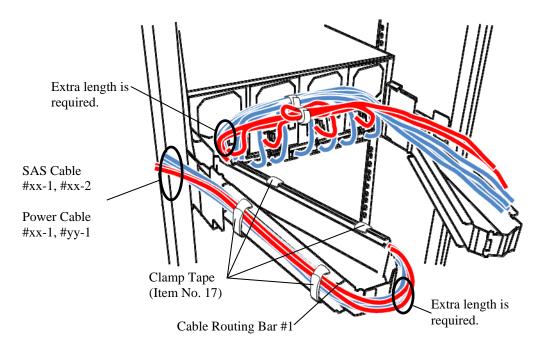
Fixation of SAS Cables (#xx-1, #xx-2) and Power Cables (#xx-1, #yy-1)
